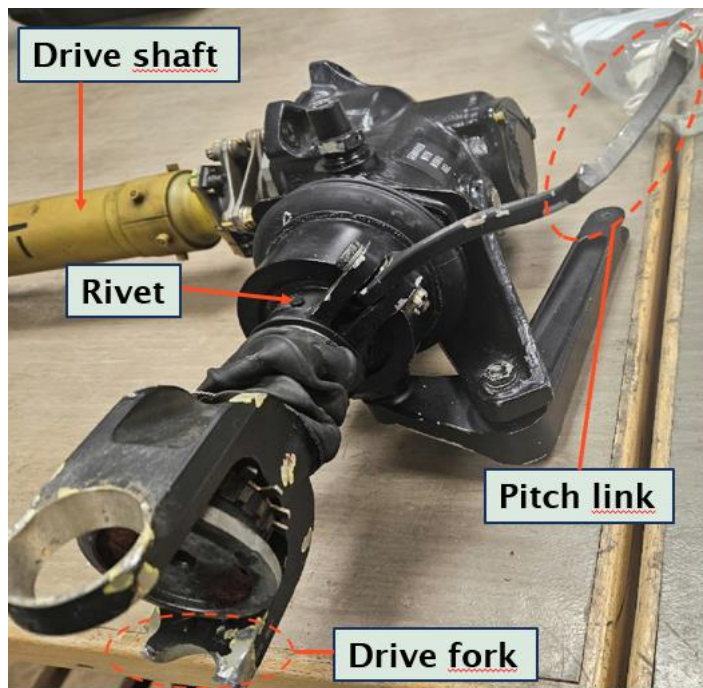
Tail rotor gearbox with damaged parts marked.
